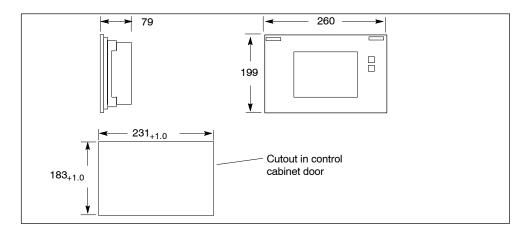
Dimension Drawings for the C7-635 Touch (Measurements in mm)
